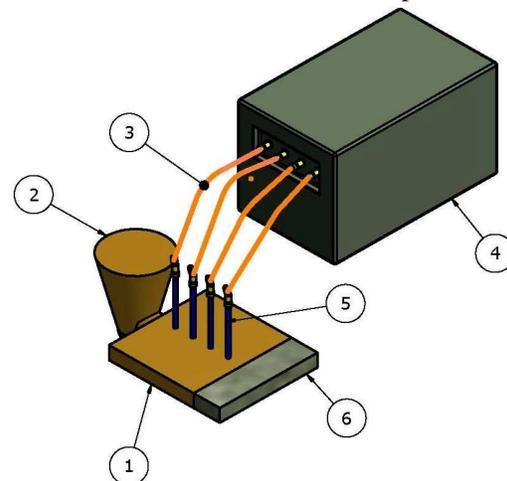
Casting and thermocouple assembly for capturing the cooling temperature.
